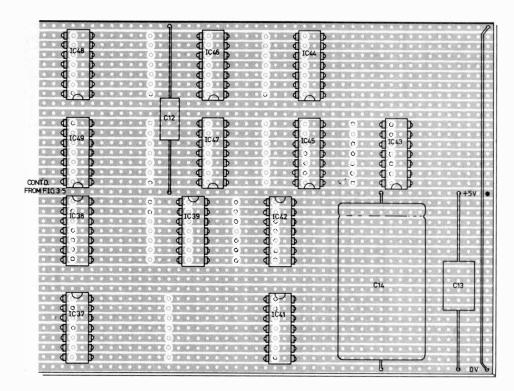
Prototype component layout for "C" section of main board (see photo last month). For assembly details one should refer to the circuit diagram
